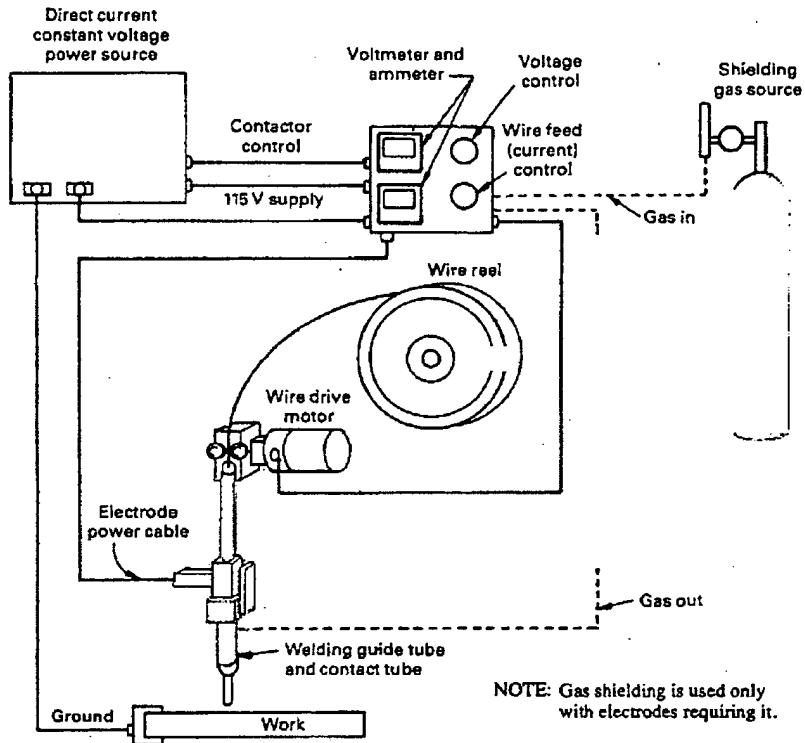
Typical flux cored automatic arc welding equipment
